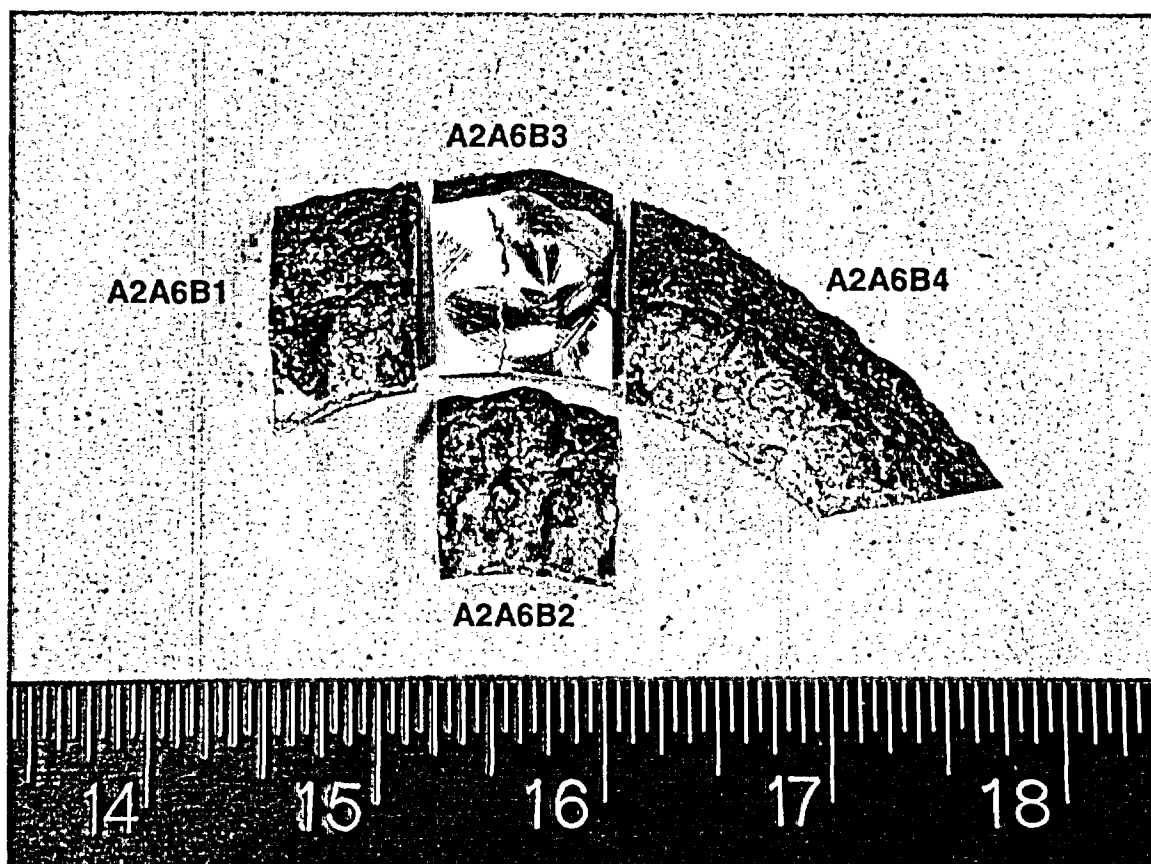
Piece A2A6B after sectioning. The bottom surface of A2A6B2 was mounted. The axial crack in A2A6B3 was opened up for SEM.
